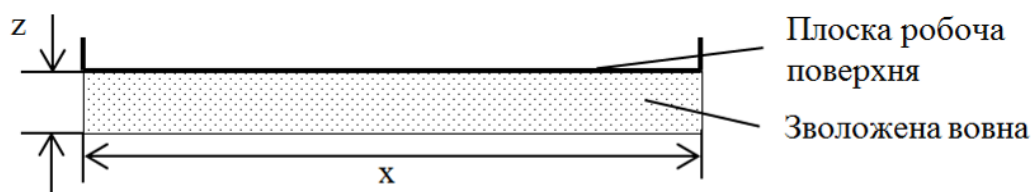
The flat working surface of the upper movable plate compact plate-fulling machine.
